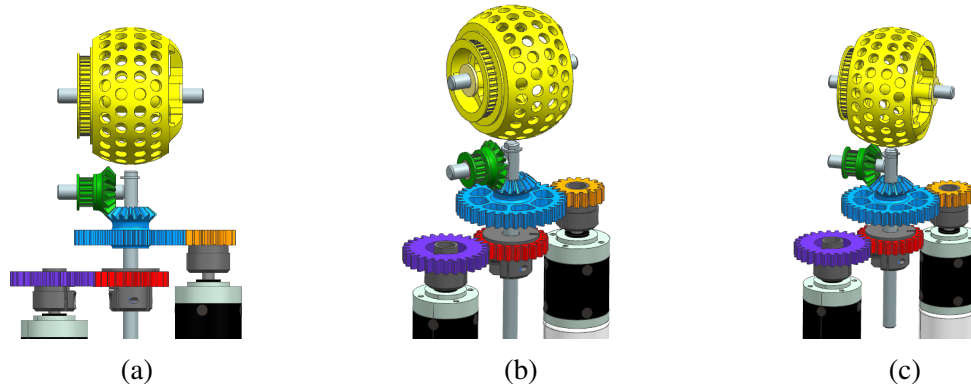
Multiple views of the internal budger gearing with each gear color coded (belt connecting the green miter and yellow ball not shown). [Purple: turn spur gear; red: turn shaft gear; orange: spin spur gear; blue: spin shaft miter gear; green: spin miter-belt drive; yellow: ball belt drive]
